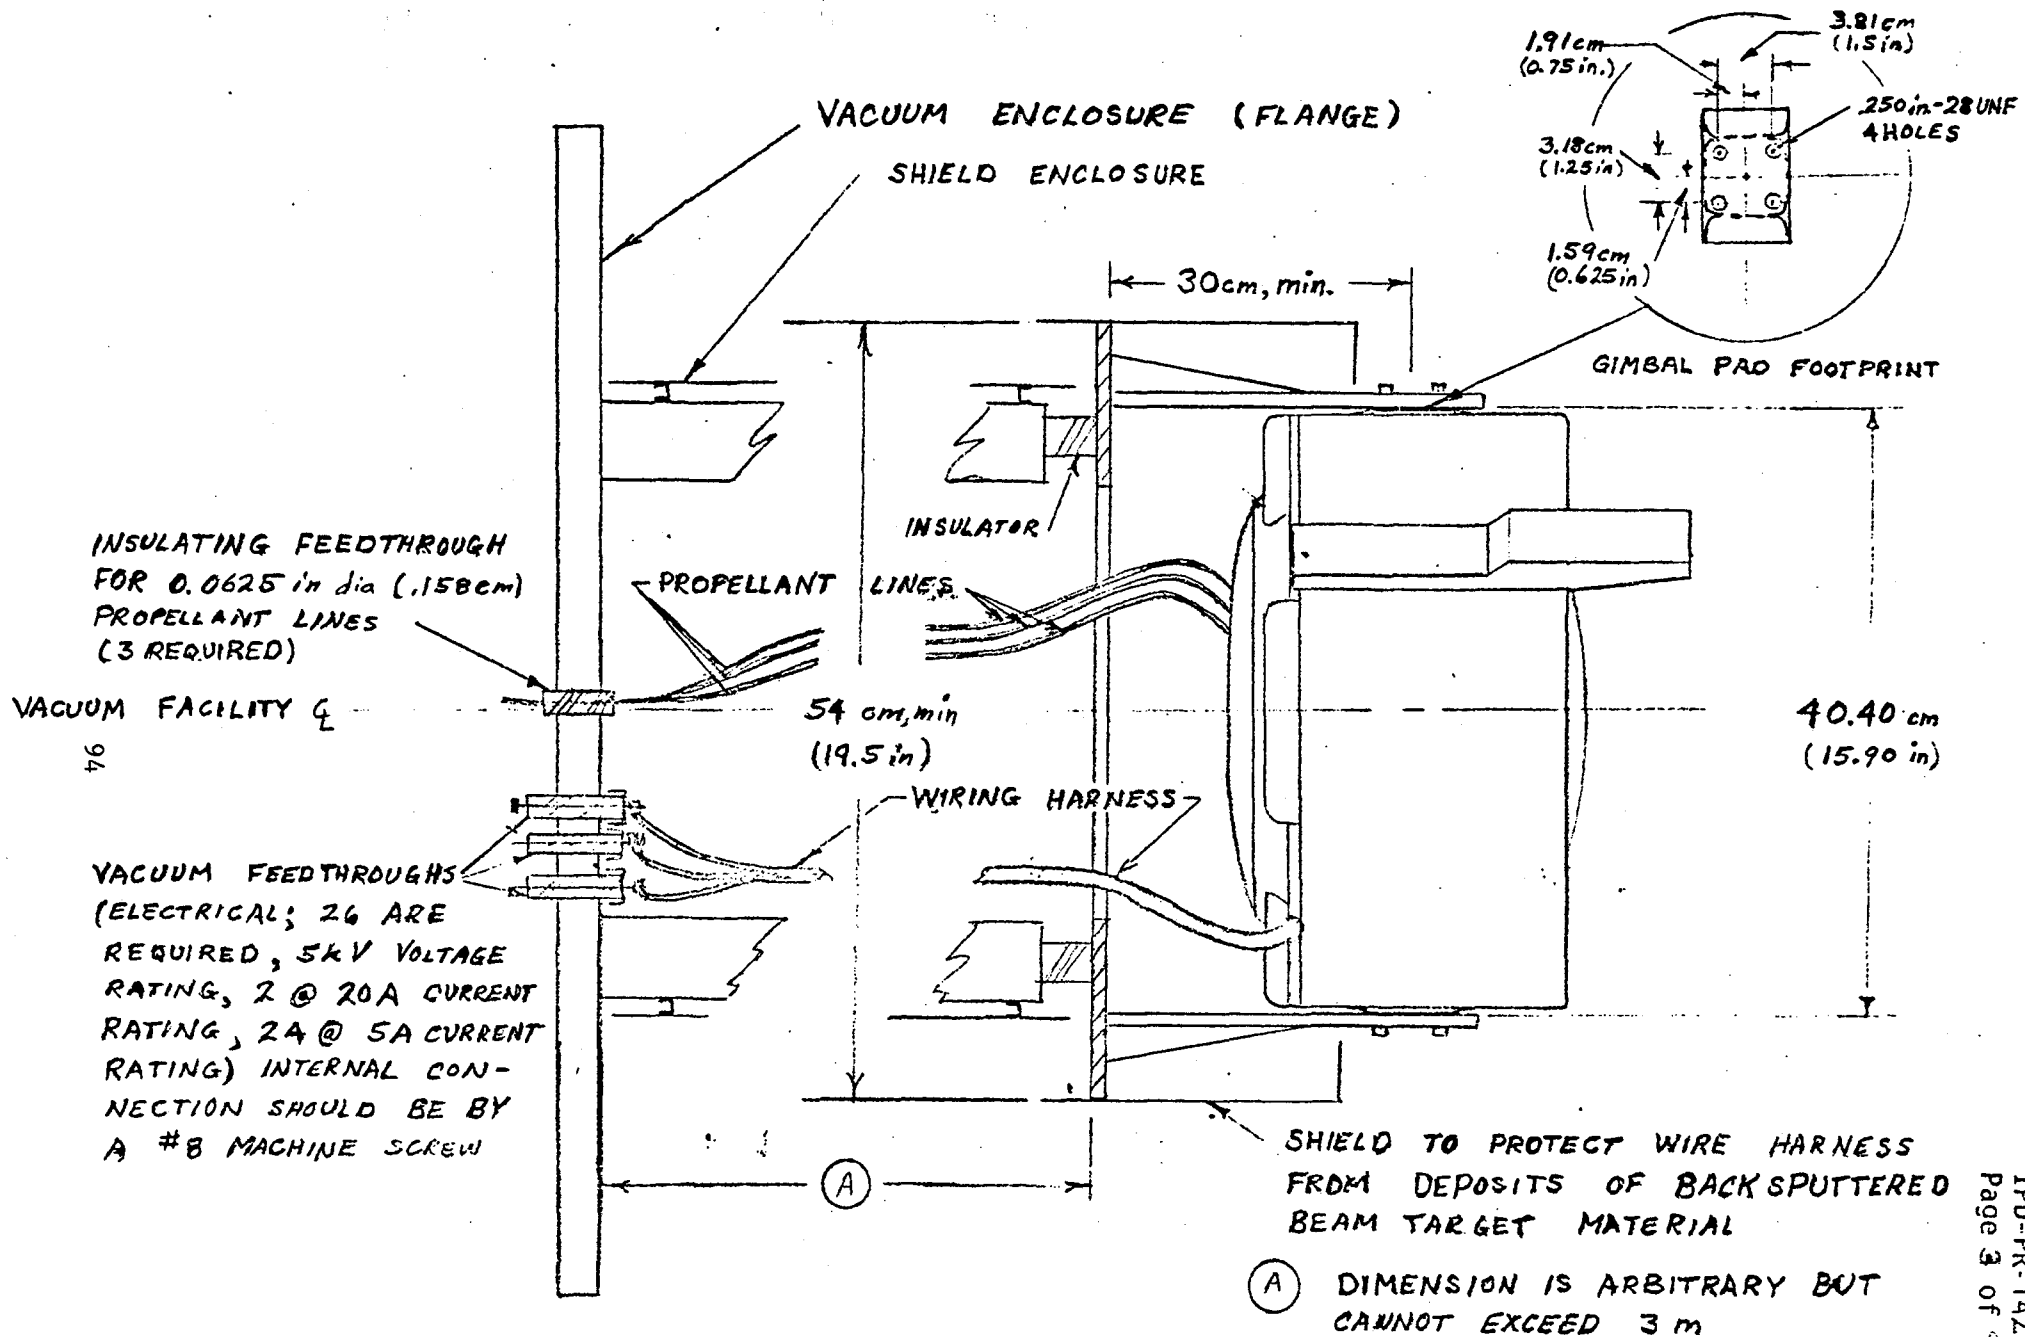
MOUNTING FOR THRUSTER ASSEMBLY FOR INSTALLATION IN VACUUM CHAMBER TEST FACILITY
